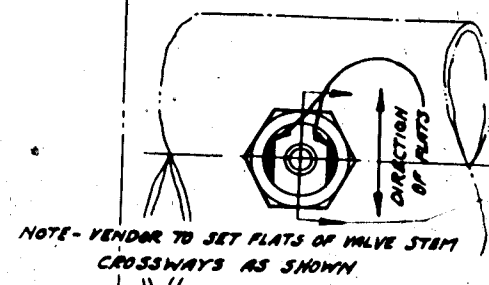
DETAIL SHOWING METHOD OF SEALING VALVE OPENING ON SHIPS HAVING 28H005-B TYPE OF TUBE.
